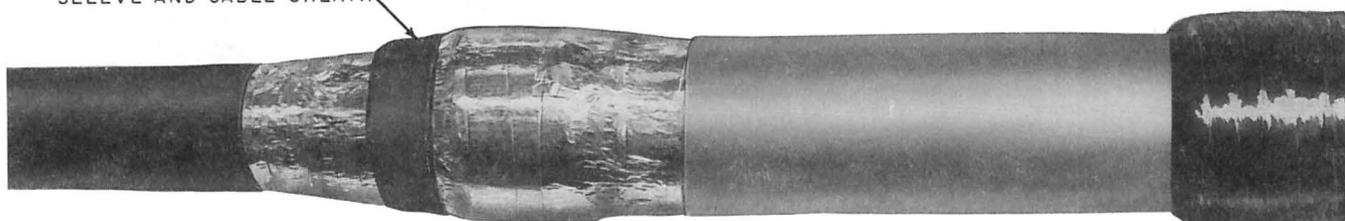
Friction Tape Collar Placed Over B Aluminum Tape
